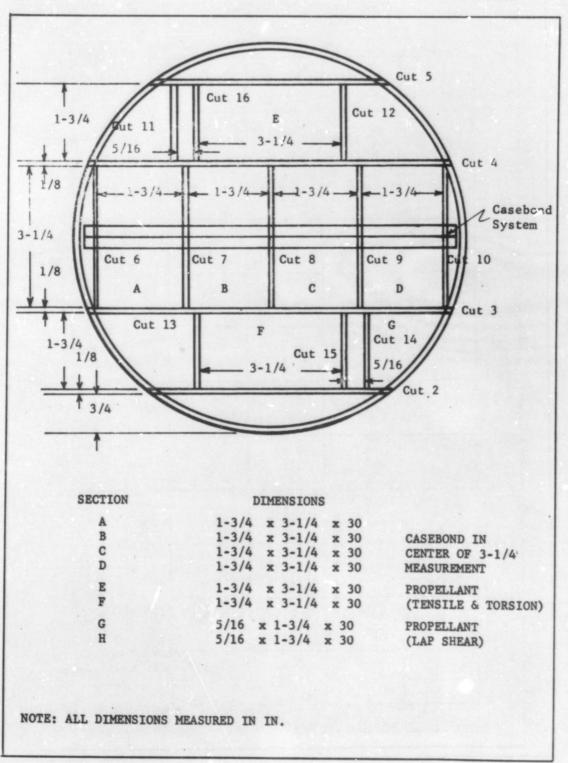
End View of Detailed Machining Plan (Grain No. 1)
